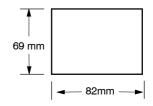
Dimensions for Cutting a Hole in the Mounting Surface of the TD 100C
